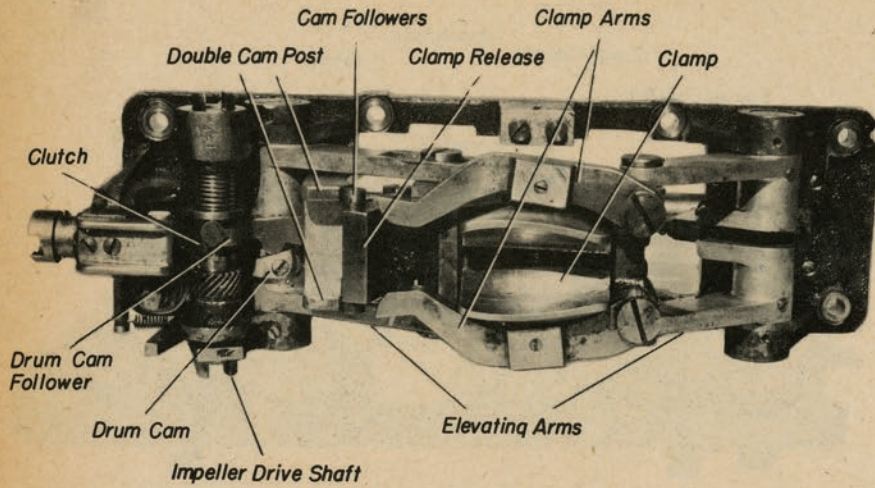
Hydroplane Elevating and Releasing Assembly, Top View
